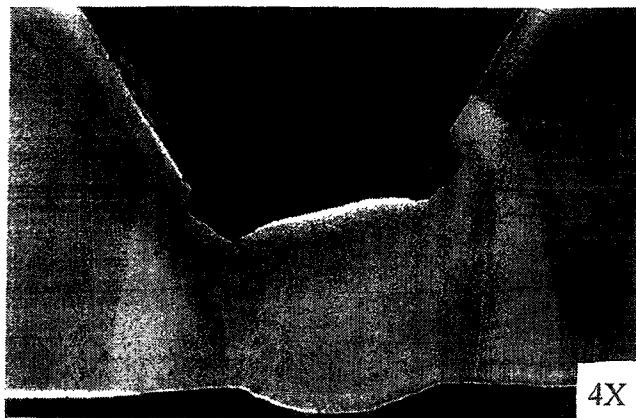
Macro photograph of HACC in the weld metal deposited using electrode B₁.
